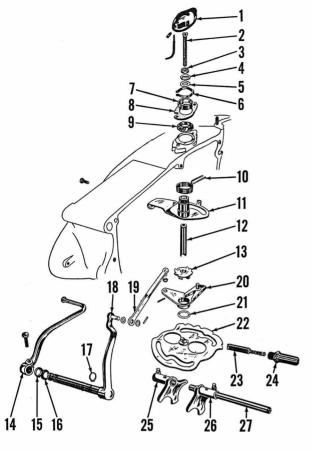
View of gear shift mechanism used on 250cc models. Other models are similar.
